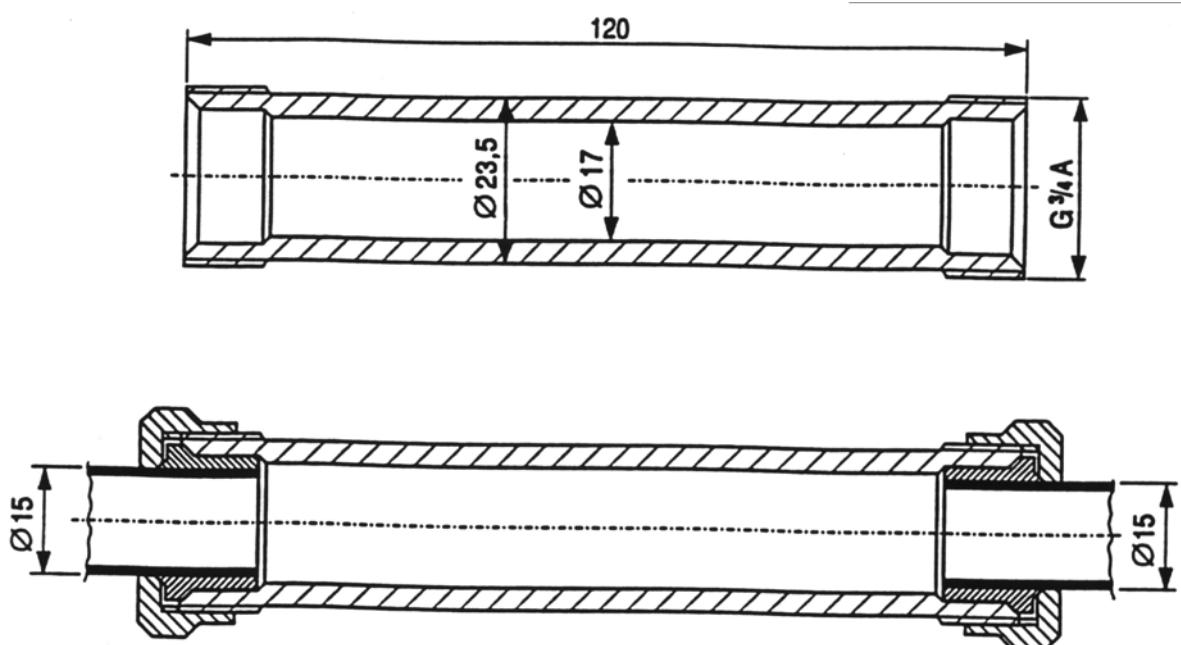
Test pieces for testing the materials for fittings.
